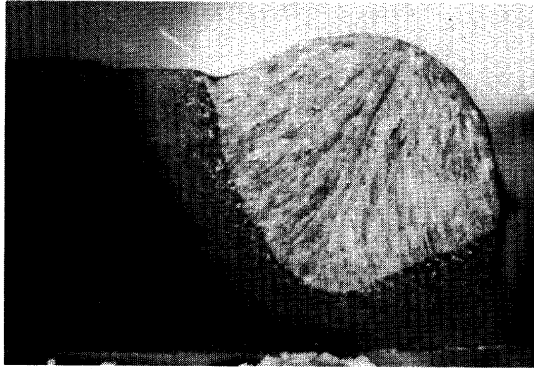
View of a metallographic cut of toe after fatigue fracture (FP-Base).
